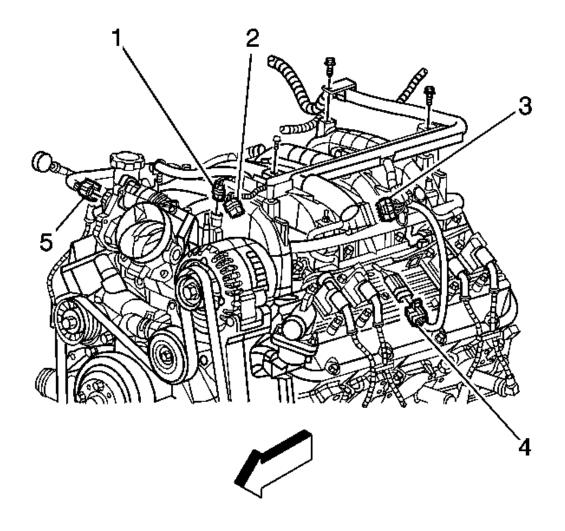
View Of Generator, Injector Harness, Ignition Coil Harness, ETC & Purge Valve Solenoid Electrical Connectors
